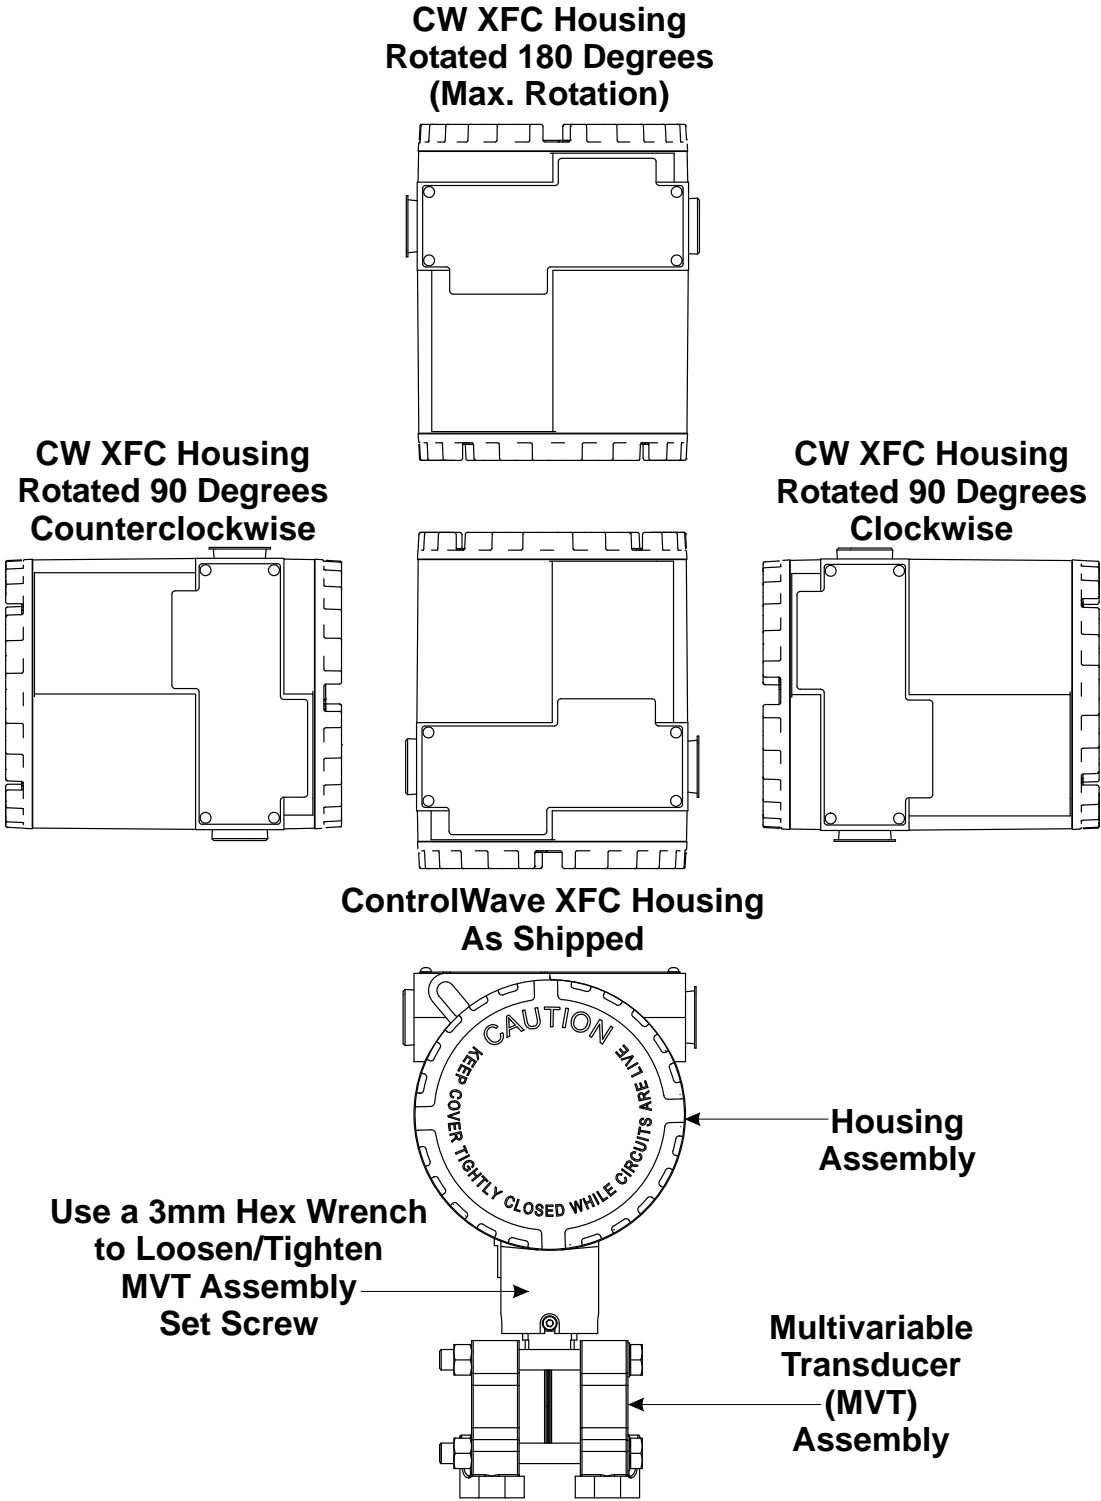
ControlWave XFC Housing Assembly Rotation Diagram
